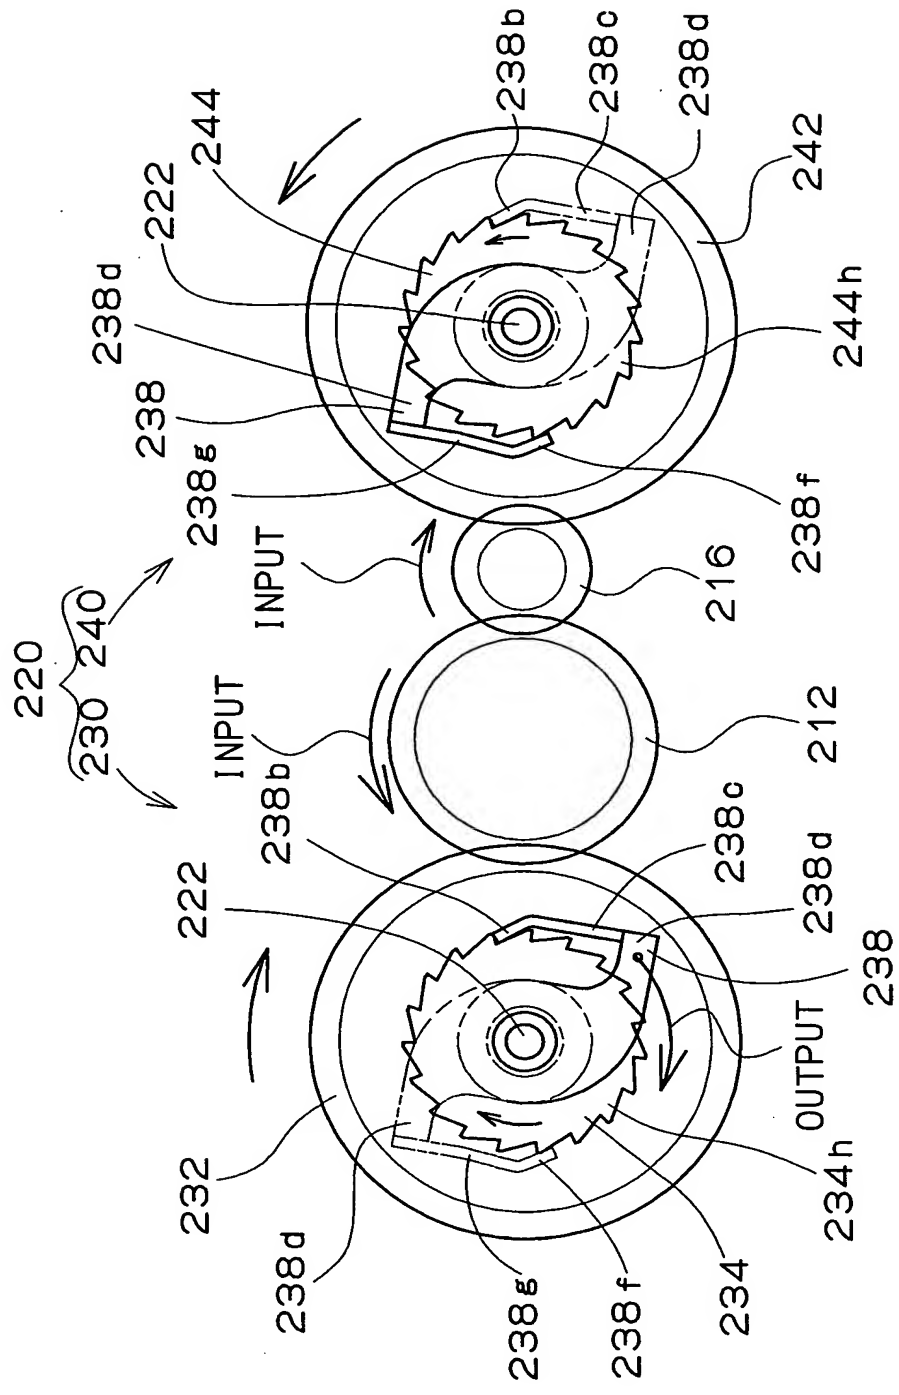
is a schematic diagram of a gear assembly 220. The assembly includes a central input gear 212, a small intermediate gear 216, and two output gears 232 and 238. The input gear 212 is driven by an 'INPUT' shaft 238b. It meshes with the intermediate gear 216, which in turn meshes with the output gear 232. The output gear 232 is connected to an 'OUTPUT' shaft 238d. The output gear 238 is also connected to an 'OUTPUT' shaft 238d. The assembly is shown in a cross-sectional view with various components labeled with reference numerals.
